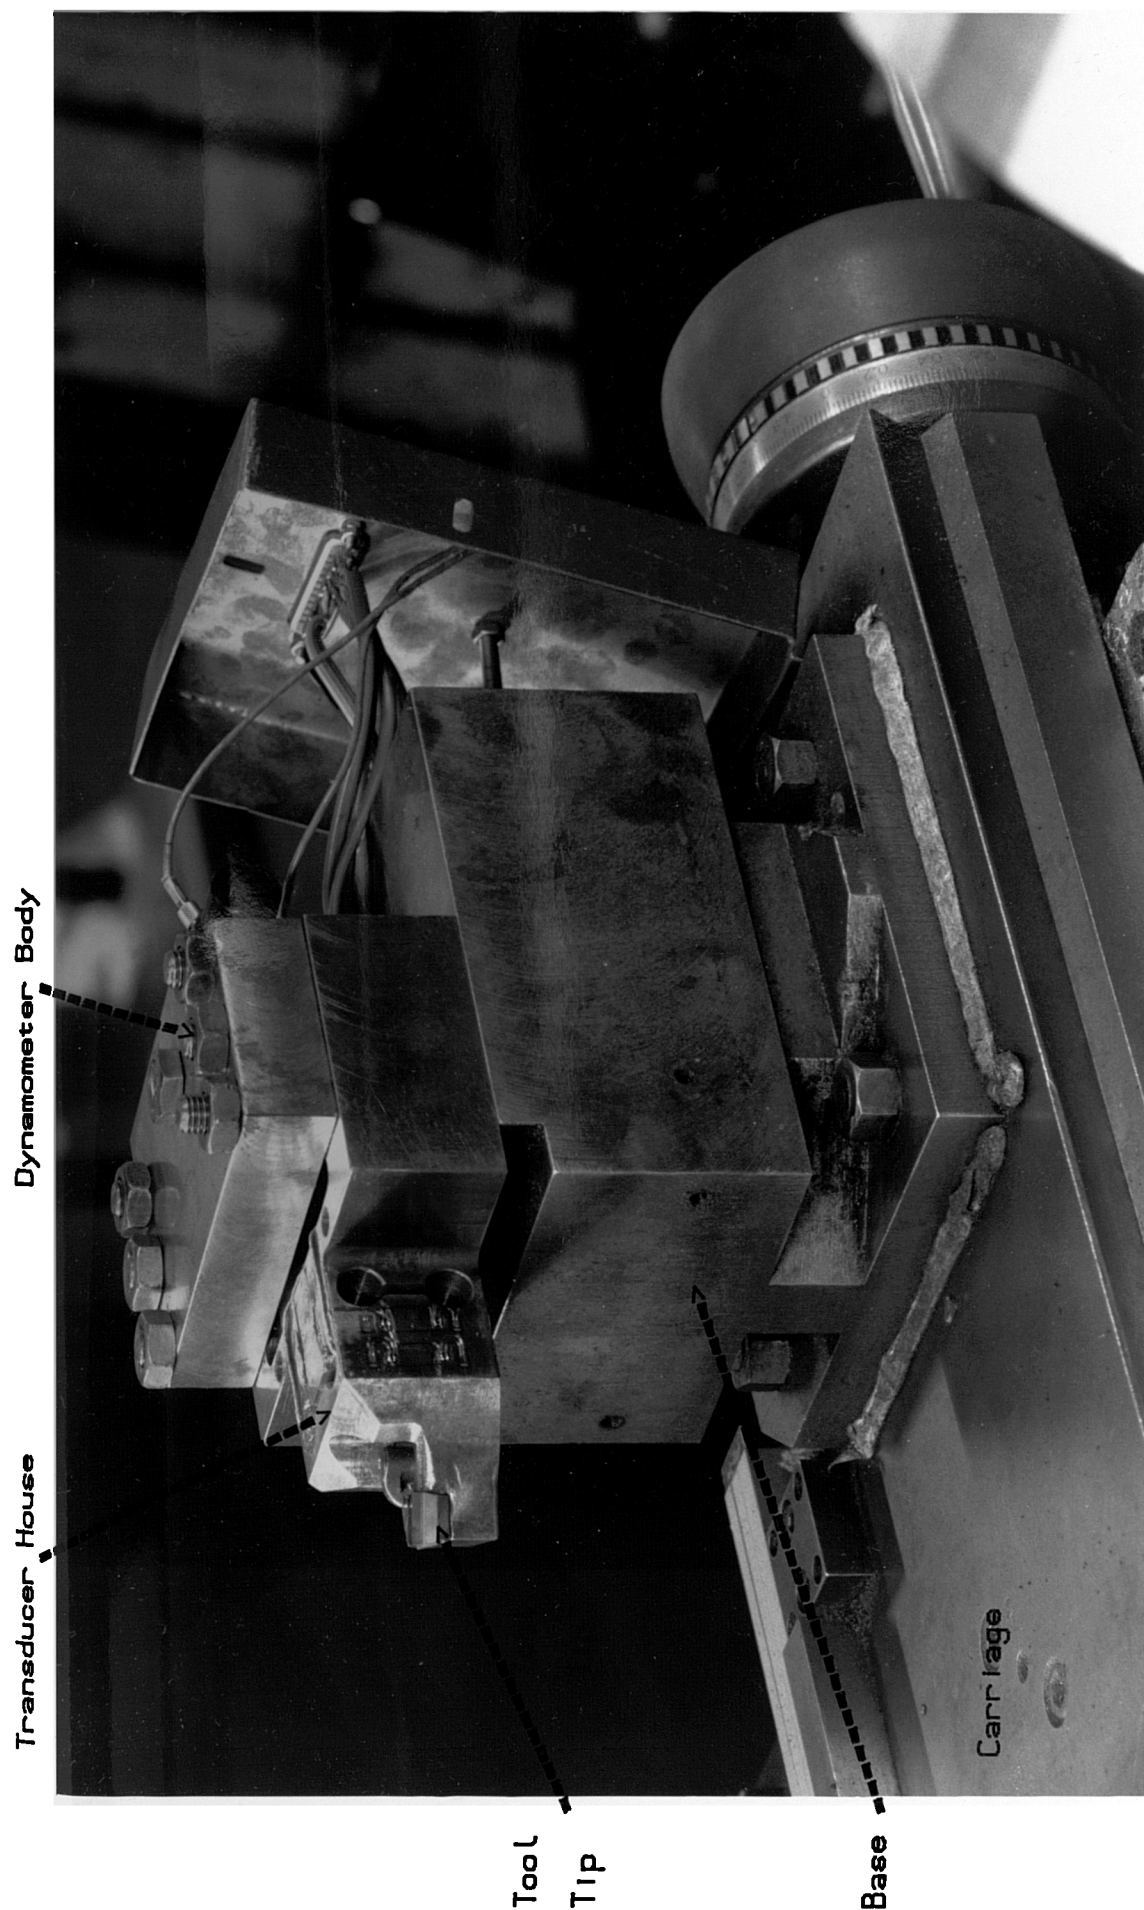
A General View of the Dynamometer Mounted on the Lathe
